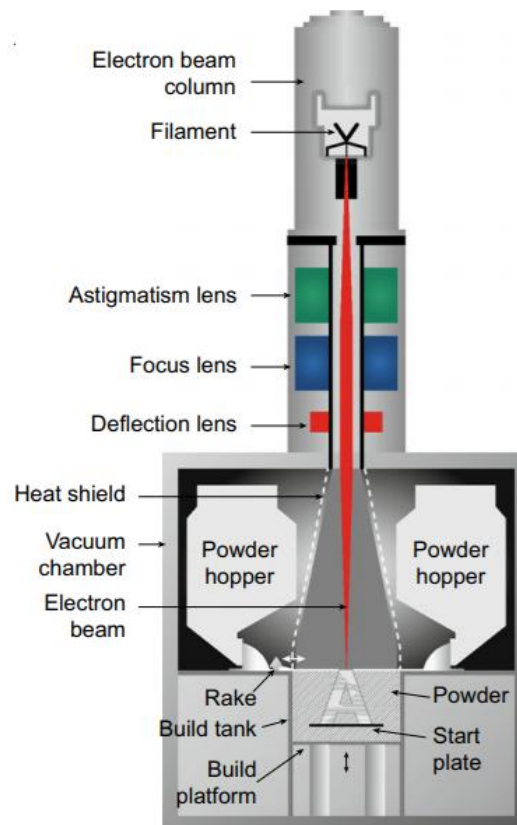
Schematic drawing of an ARCAM EBM machine [20]
